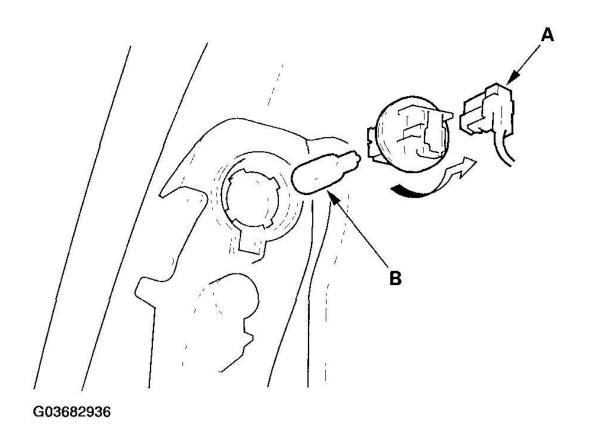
Disconnecting 2P Connector And Removing Bulb Socket Courtesy of AMERICAN HONDA MOTOR CO., INC.
